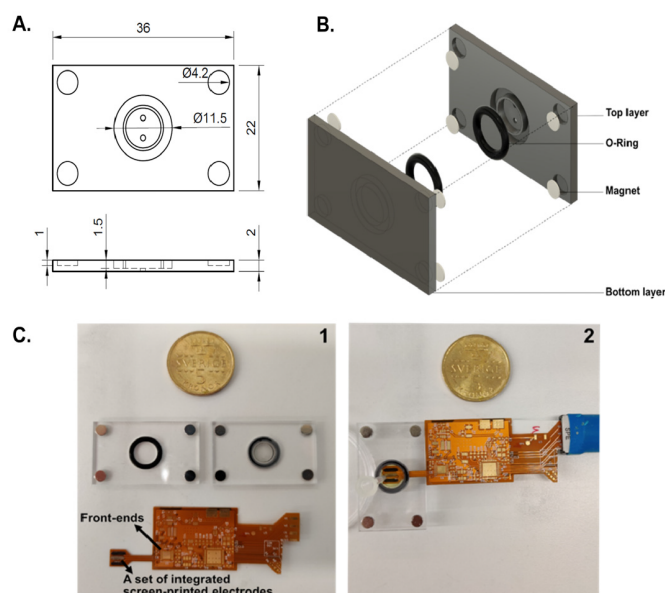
a. CAD drawing (all dimensions are in mm) and b. schematic representation of the reservoir chamber module. c. (1) the bare FPCB device and disassembled chamber, and (2) the fully integrated FPCB platform into the chamber module.
